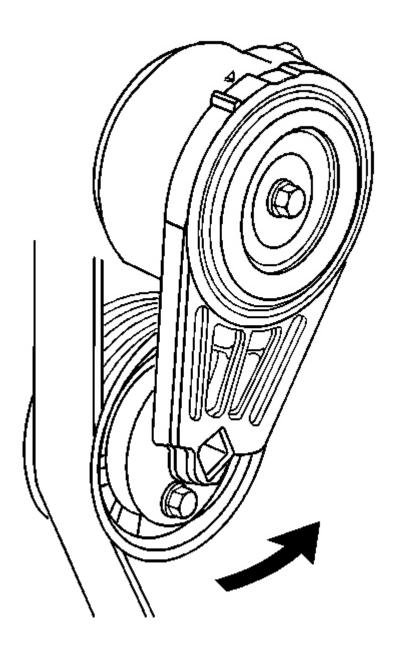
Releasing Drive Belt Tension Courtesy of GENERAL MOTORS CORP.
